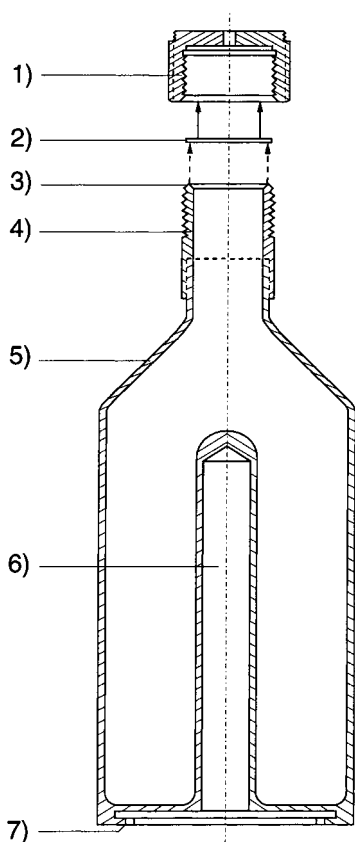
The vessel. Legend: 1, screw cap; 2, gold plate, 0.4 mm thick; 3, sharp edge, 45°; 4, sparkal neck (70% Cu-30% W); 5, flanged side (by cold rolling); 6, re-entrant well for thermometer and heater assembly; 7, bayonet-catch for forcing the insert against the flat bottom.
